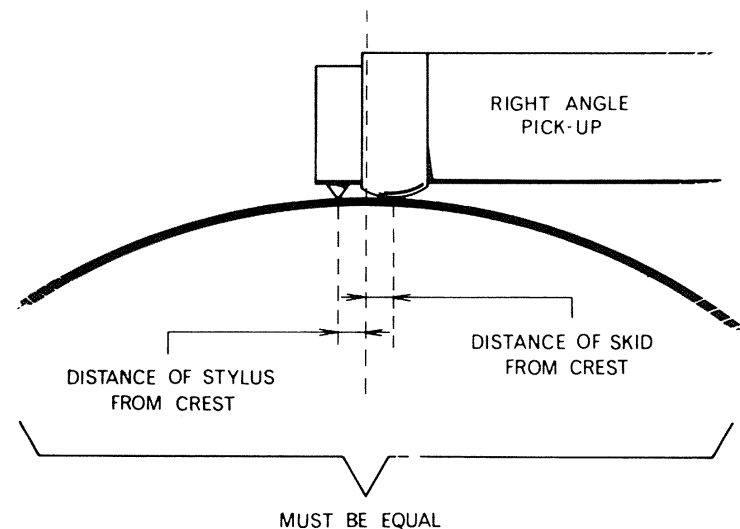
Condition to be observed when the right-angle pick-up is used on a cylindrical workpiece
